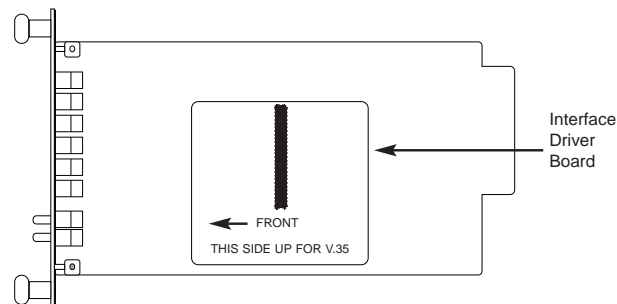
Closeup of Top Side of Model 1095RC Interface Driver Board
